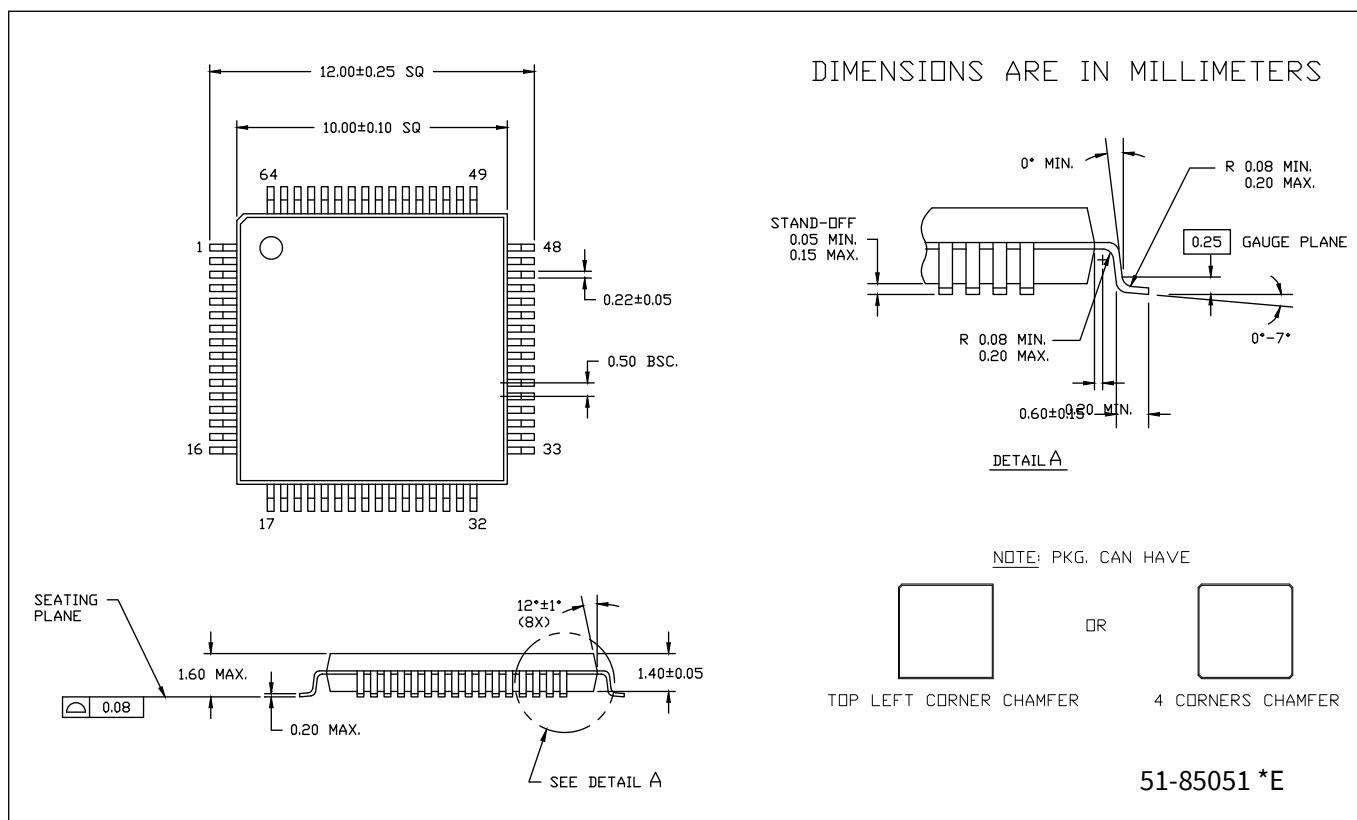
64LD TQFP (10 x 10 x 1.4 mm) A64SB (PG-TQFP-64) package outline
